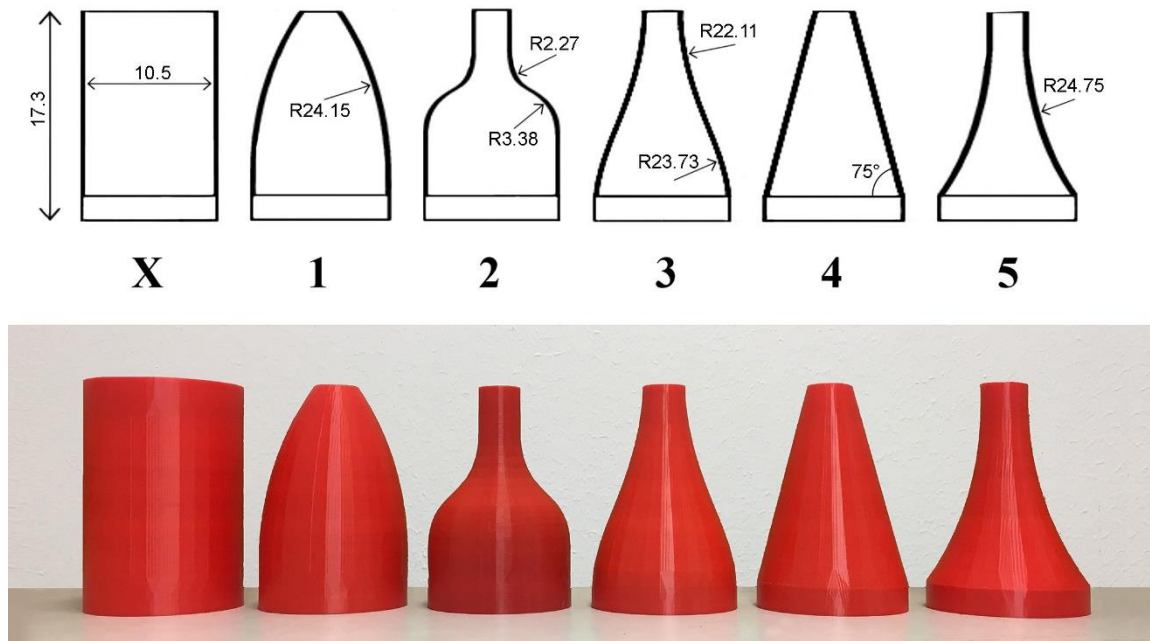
Sections of nozzle-forms 1-5 tested against the control group-X (above). 3D-printed nozzles developed with uniform inlet diameter = 10.8 cm & outlet diameter = 2.5 cm (below)
